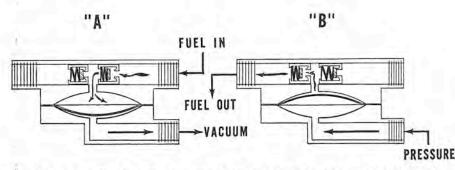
Schematic view of diaphragm type fuel pump showing method of operation. Vacuum - Pressure line attaches to lower crankcase. When powerhead piston moves upward in cylinder, vacuum in crankcase draws diaphragm out and fuel in as shown in view "A". Crankcase pressure resulting from power stroke forces diaphragm in and fuel out as shown in view "B".
